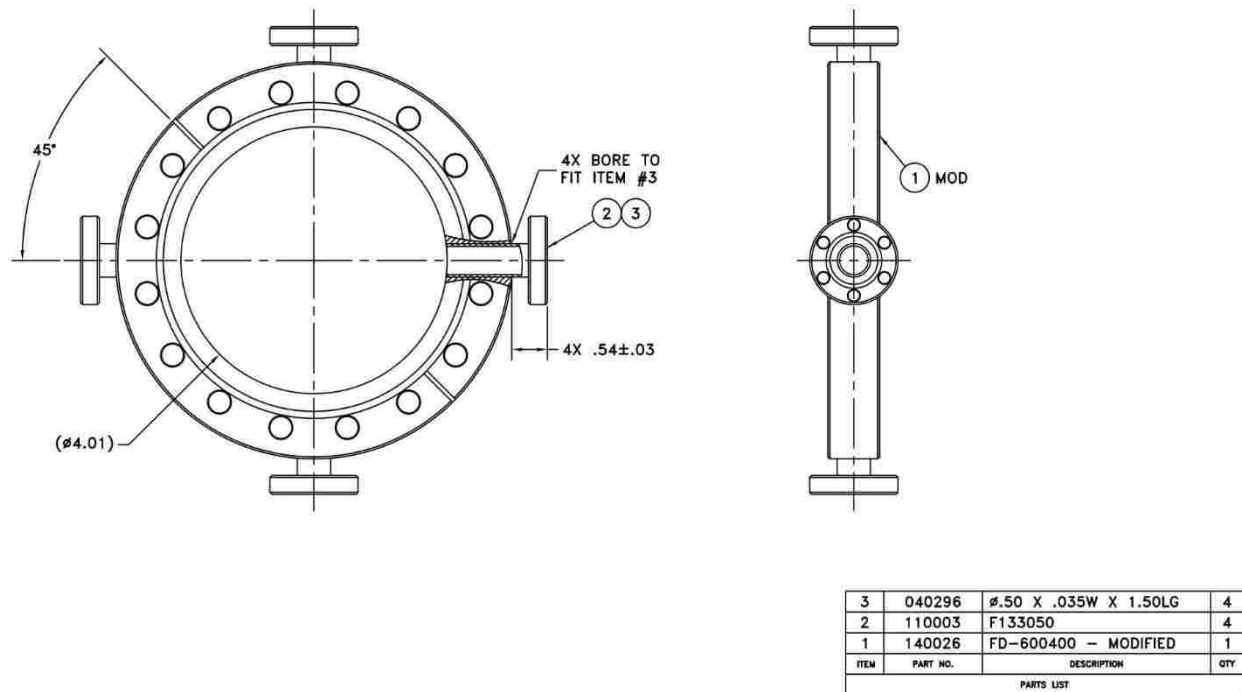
AutoCAD drawing of XY deflecting flange.
